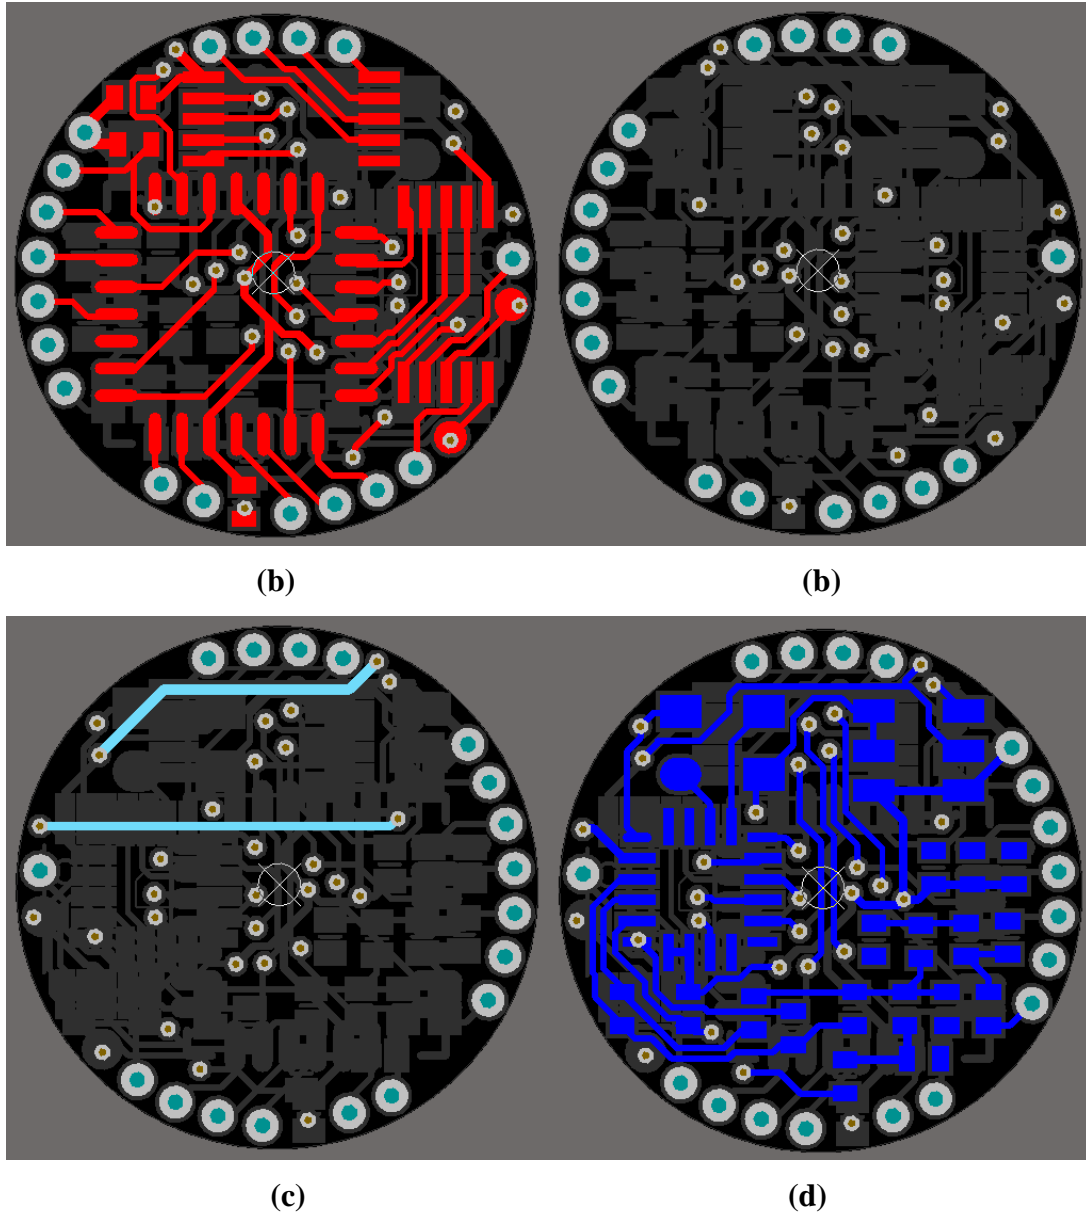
PCB Board Design of the Internal Wireless Communication Module
